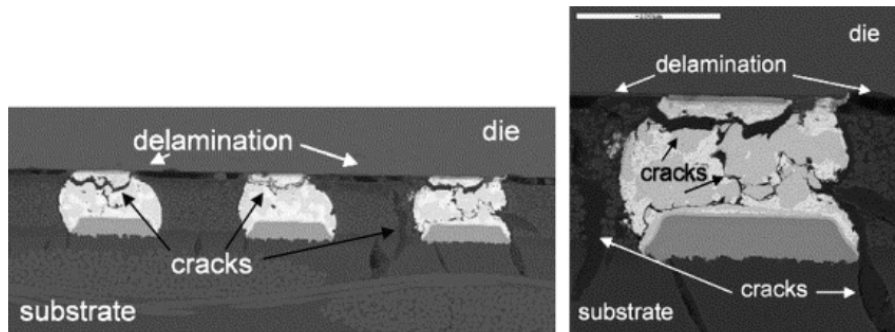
Cracks propagation in the solder joints. [43]
